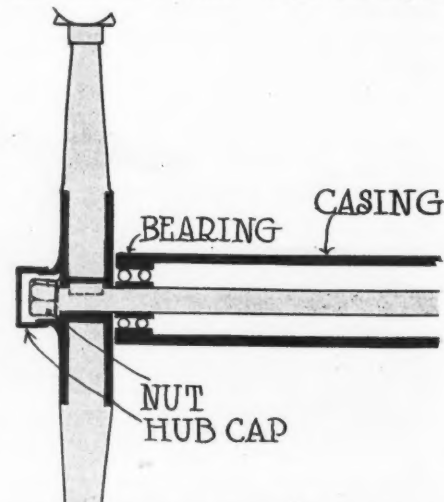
Semi-floating type of axle which has the wheel bearing inside the housing, and the wheel held in place by a castellated nut
